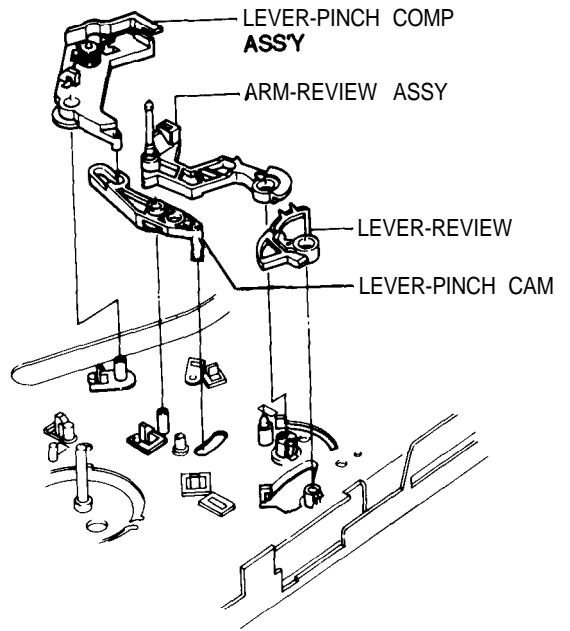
Exploded View of Lever Pinch Comp Ass'y, Lever Pinch Cam, Arm Review Ass'y & Lever Review Ass'y
